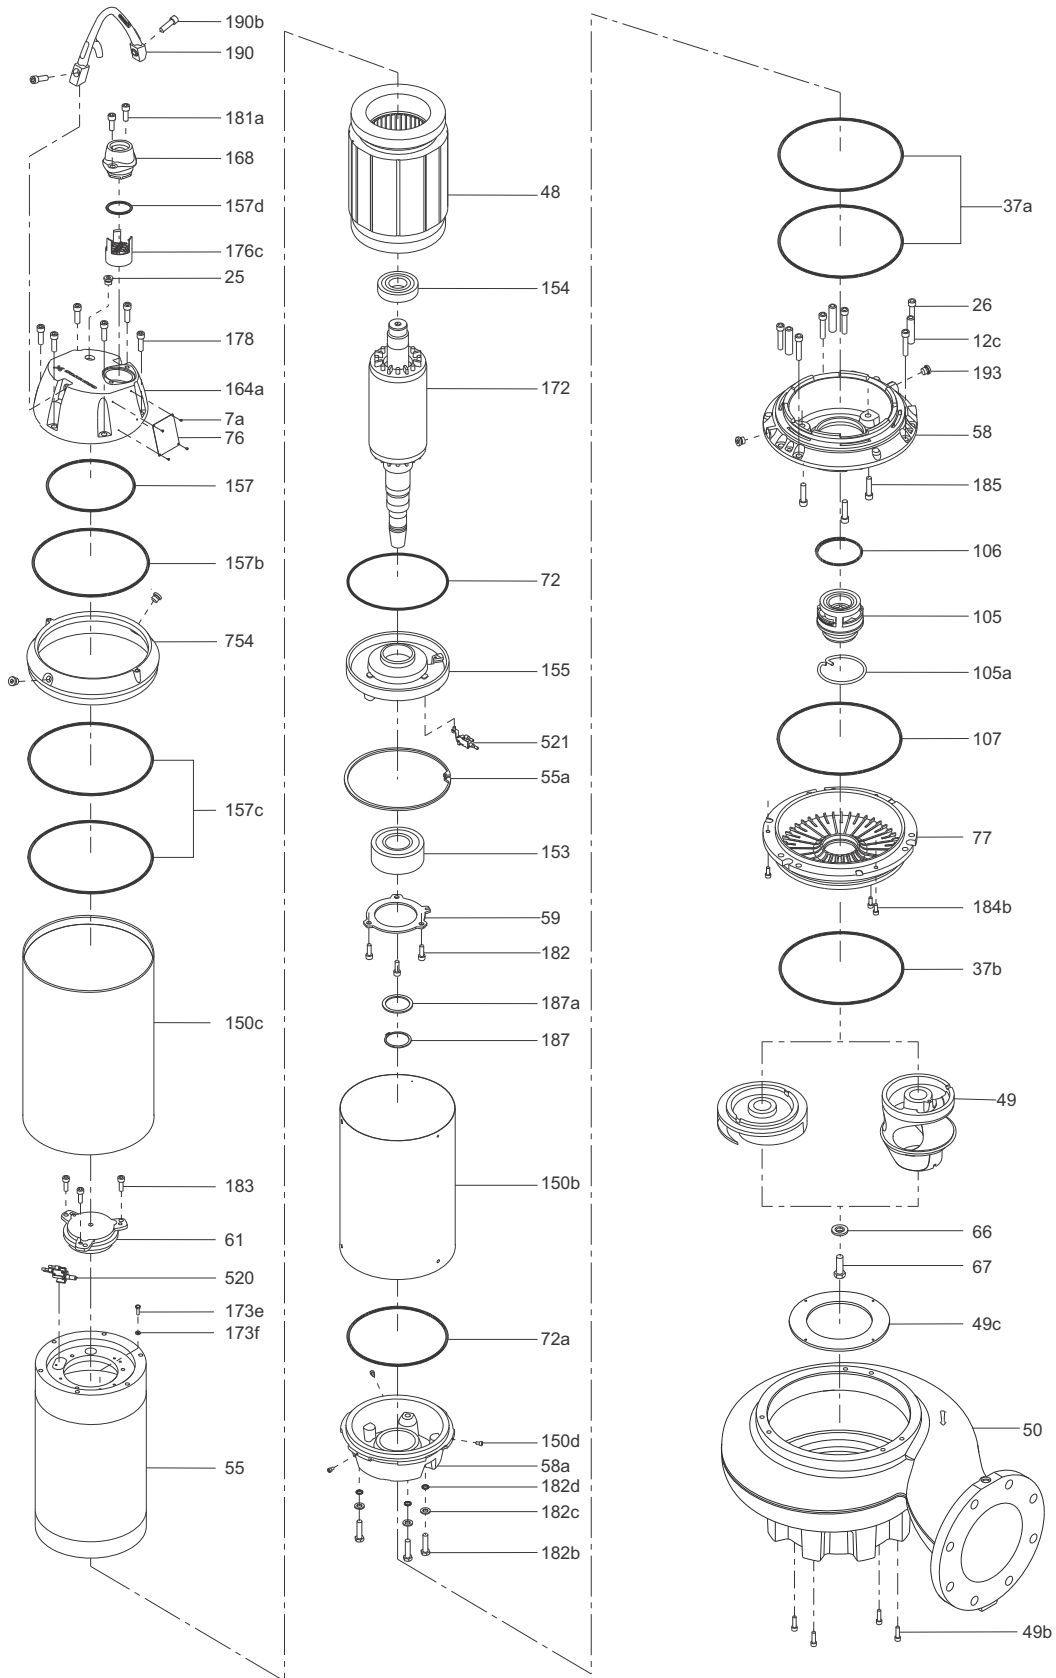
Exploded view, SE pump, 2- and 4-poles
